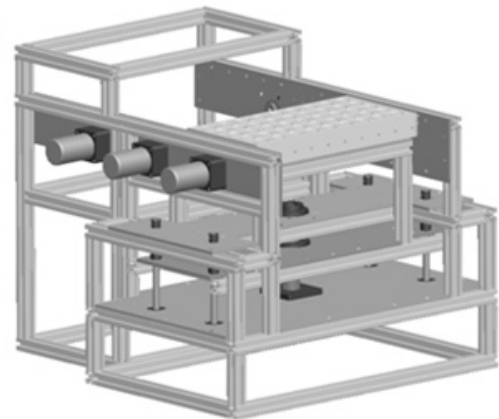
Design of wax ring removing device including lifting part and cutting part
